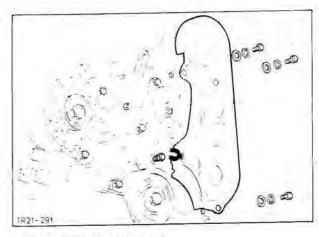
Fit toothed belt guard (fan removed for clarity)
